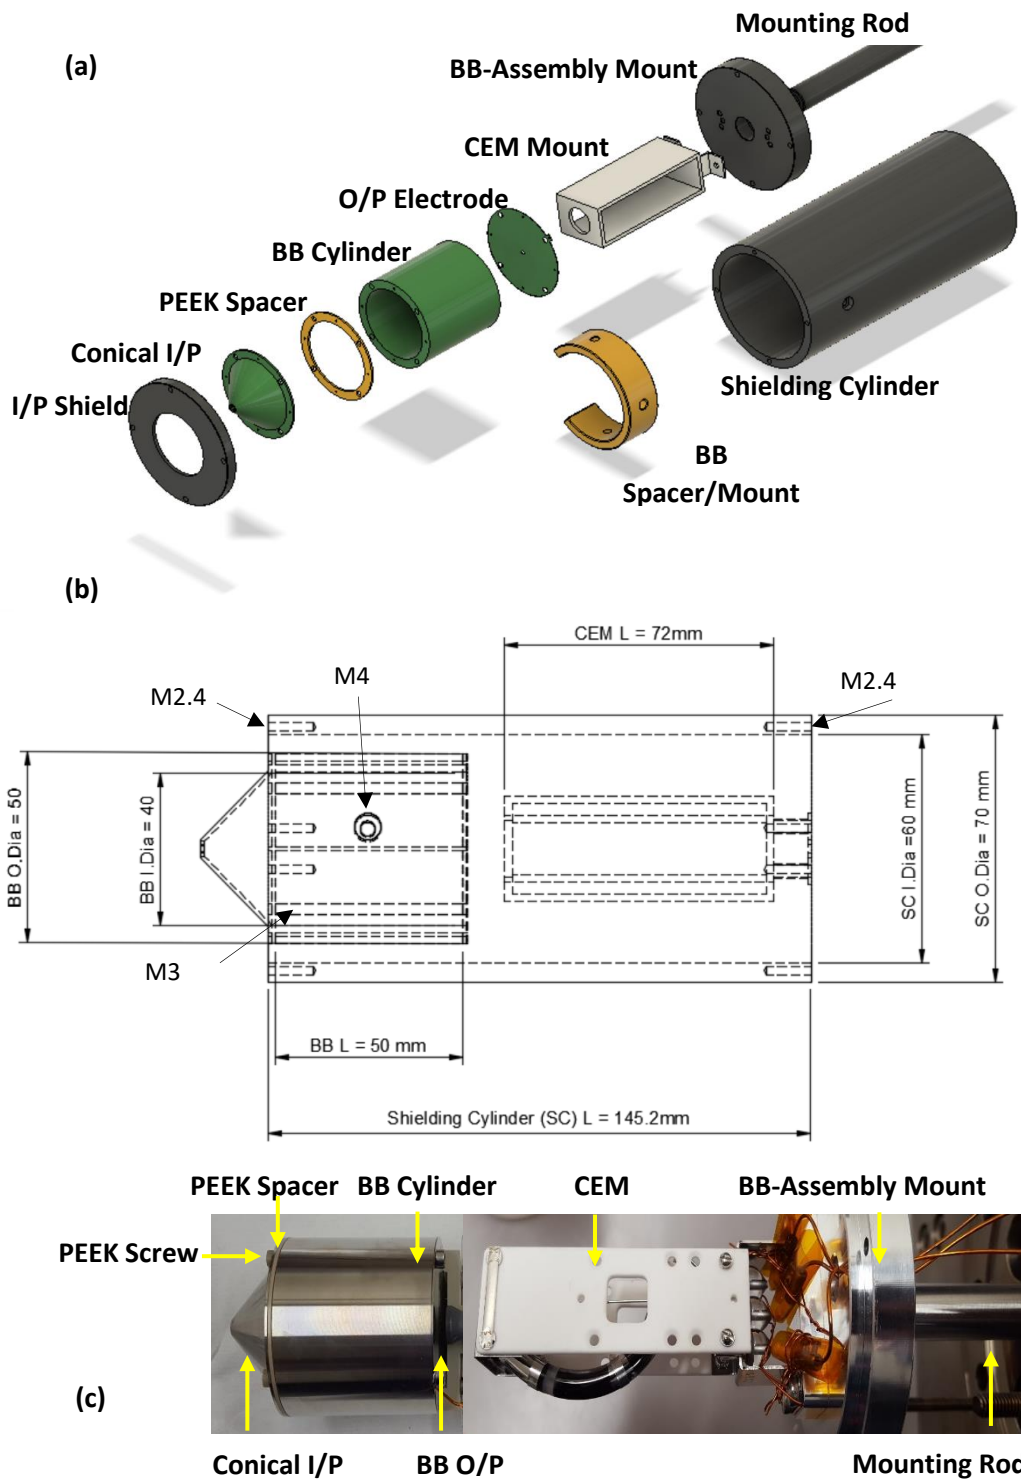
Components of BB analyser assembly (a) in a CAD drawing with 3D isotropic view and (b) 2D side view and (c) photograph of the BB assembly.
